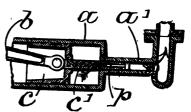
Serpollet system. Vertical central section showing alternative arrangement of exhaust.
